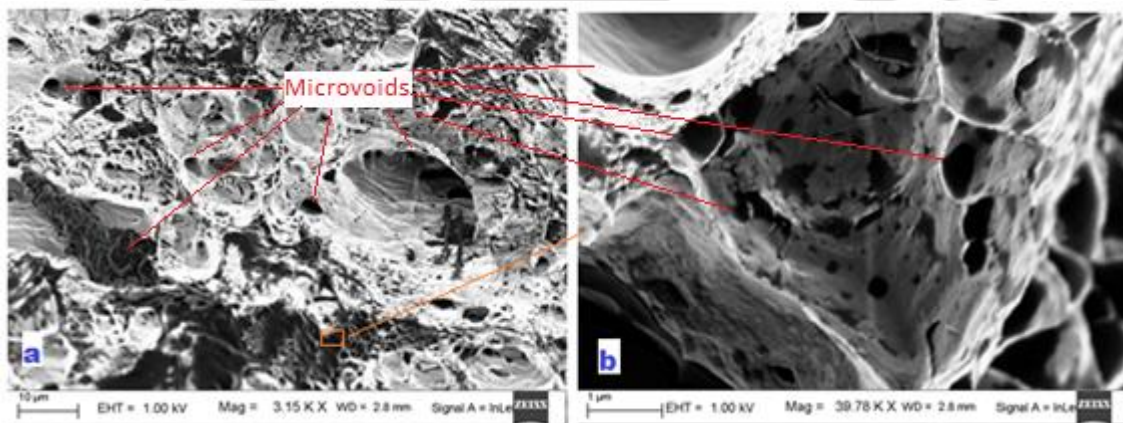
FESEM images of the fracture surface of weld region of tensile specimen.
